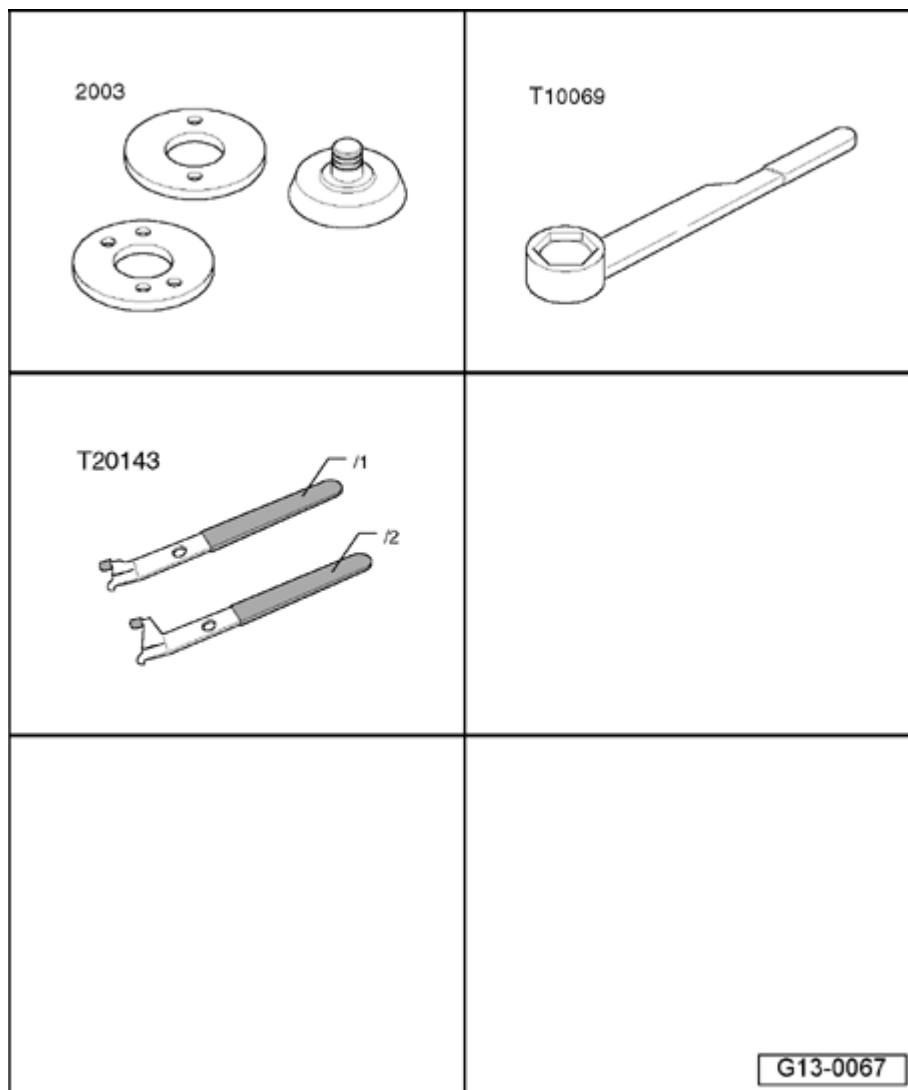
Identifying Special Tools - Crankshaft Seal, Timing Chain Side, Replacing
